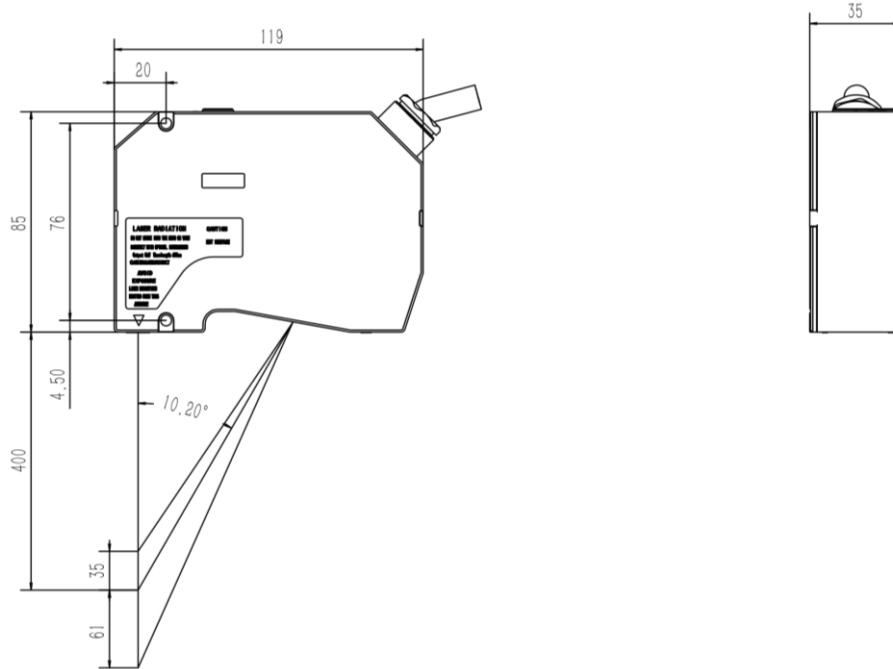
SGI030/5 Sensor Head dimensional diagram Unit (mm)
